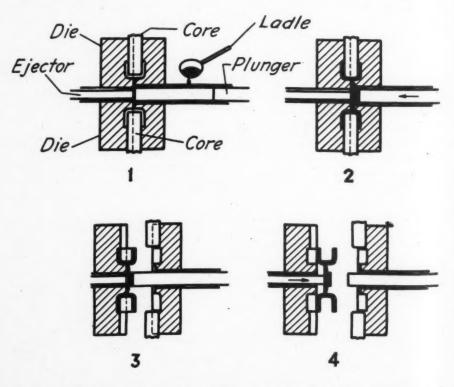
Diagram illustrating four stages in the production of cup shaped die castings in a cold chamber machine having a horizontal plunger: 1—Ladling metal into cold chamber. 2—Molten metal after it is forced into die. 3—Cores withdrawn, die opened and plunger advanced to eject casting from fixed half of die. 4—Plunger withdrawn and ejector advanced to force gate of casting from ejector half of die.
